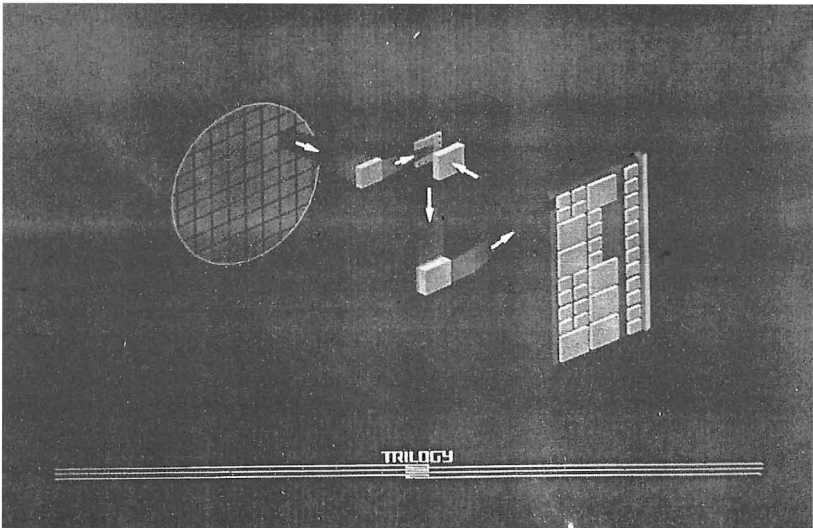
Chips are tested, packaged, tested and mounted on a p-c board.
